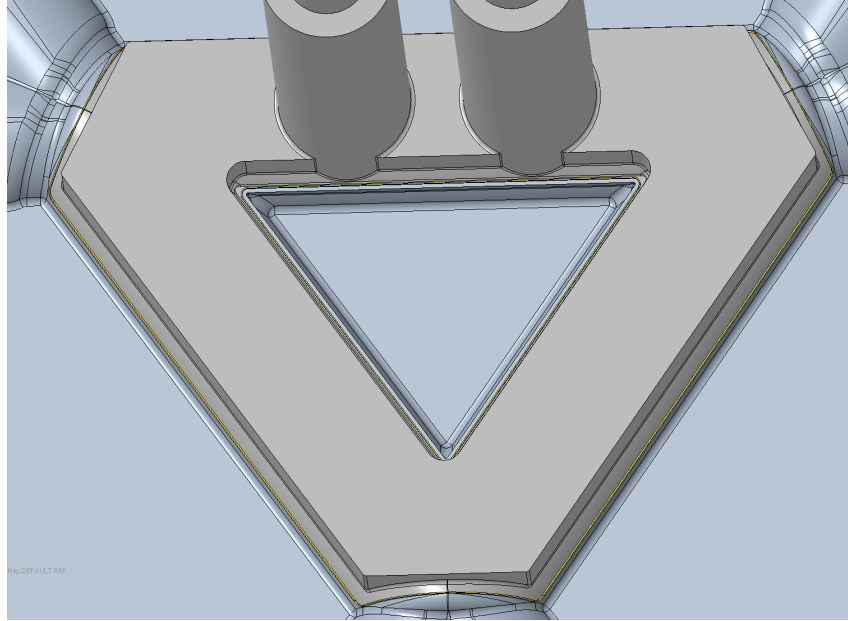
Tube Vacuum Cap welded to Tube Vacuum Body in 2 welds. The Inner weld is a simple straight down weld in a single plane. The Outer weld will be made in 6 passes. Each tube intersection will be welded by starting in the straight, but not perpendicular to the face. The weld will then translate around the corner before rotating around the tube intersection before translating back to the next straight. The straight sections will then be welded to join the tube intersection welds.
